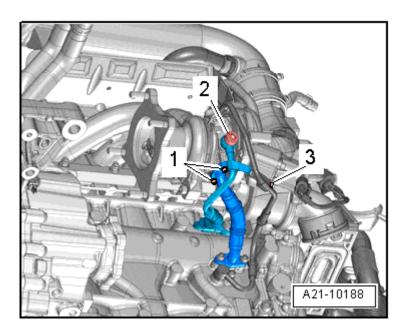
Identifying Oil Return Line, Coolant Line And Oil Supply Line Fasteners
